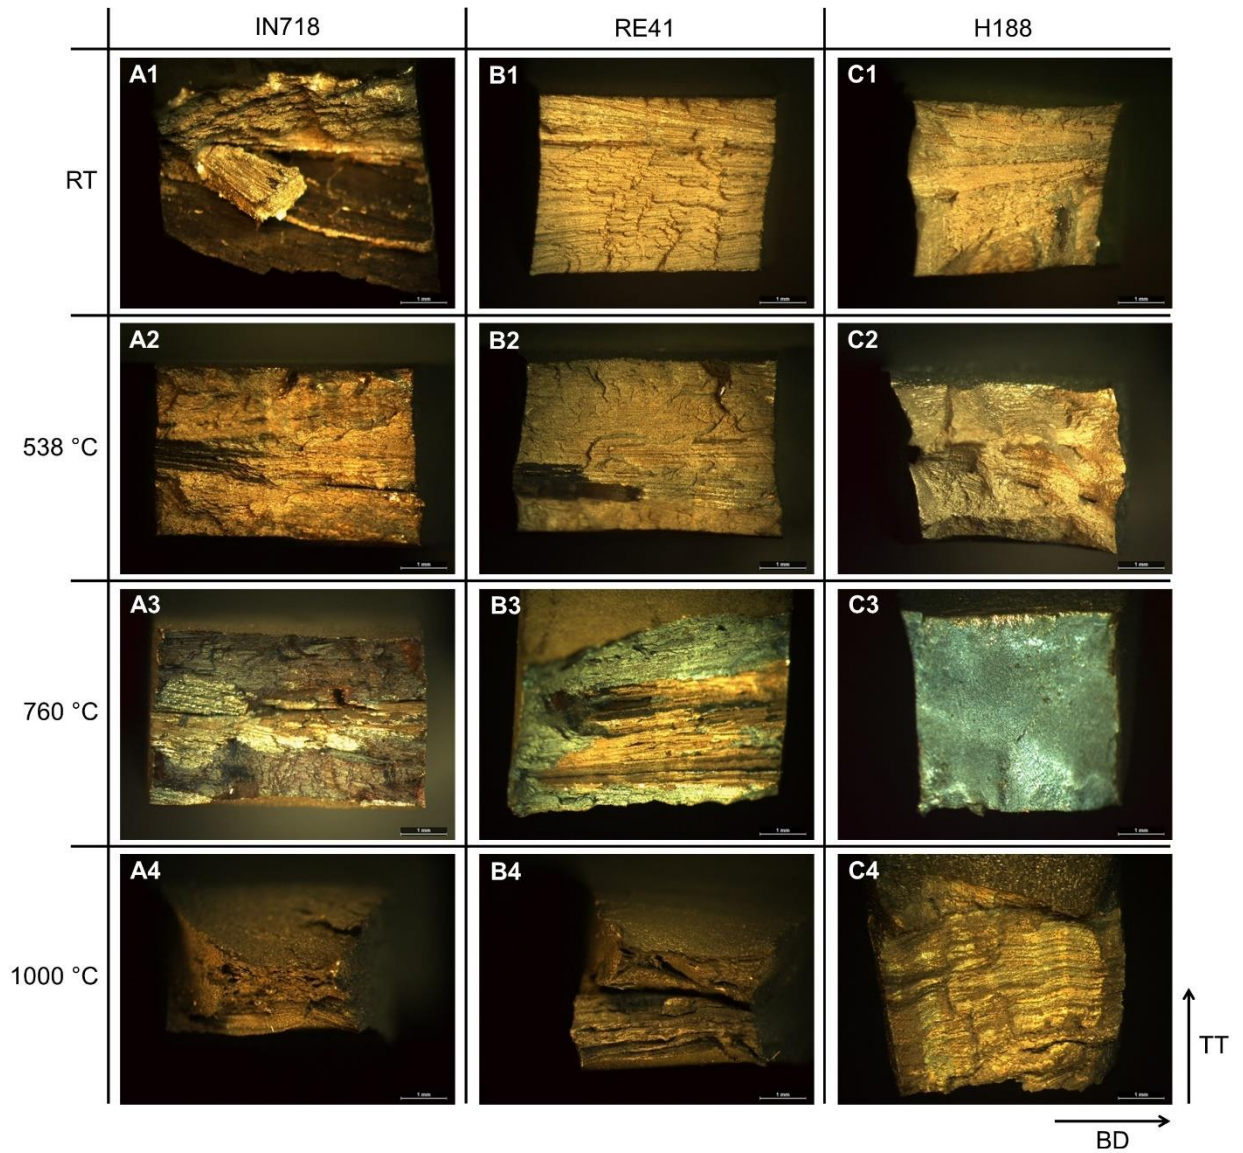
Heat-treated macro fractographic images of fracture surfaces. (A) IN718, (B) RE41, (C) H188, (1) RT, (2) 538 °C, (3) 760 °C, (4) 1000 °C.
